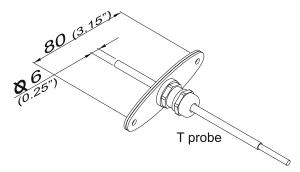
Flange for T probe Ø 6 mm (1/4"), HA010207
